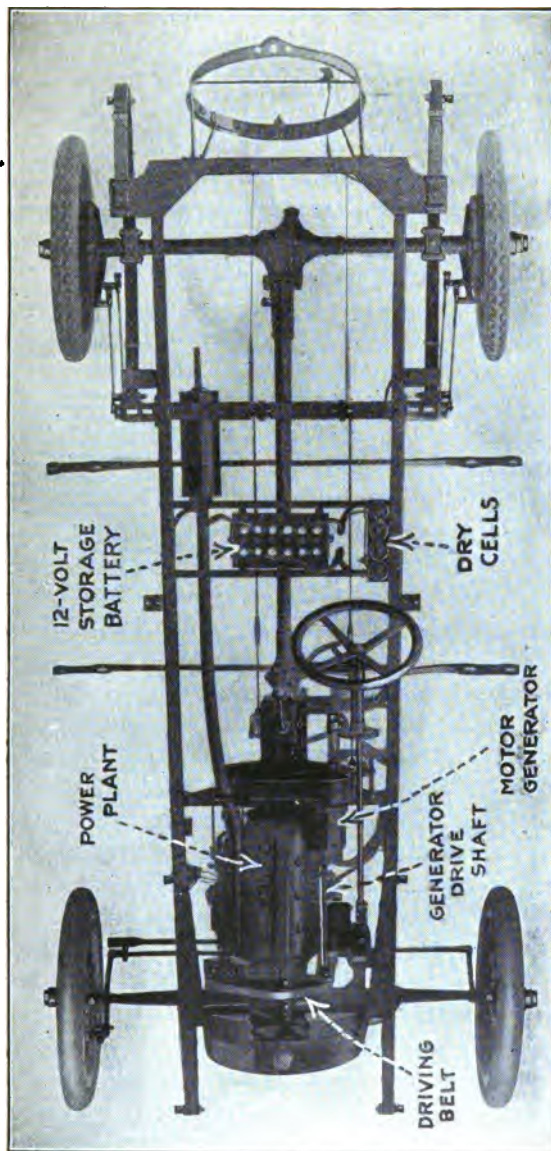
Plan View of 1916 Maxwell Chassis Showing Location of Starting System Parts. Note Belt Drive to Generator Driving Shaft.
